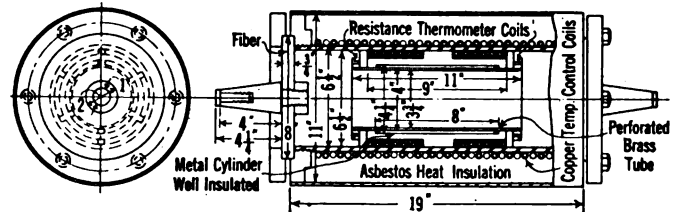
DIAGRAM SHOWING CONSTRUCTION AND DIMENSIONS OF TUBE
